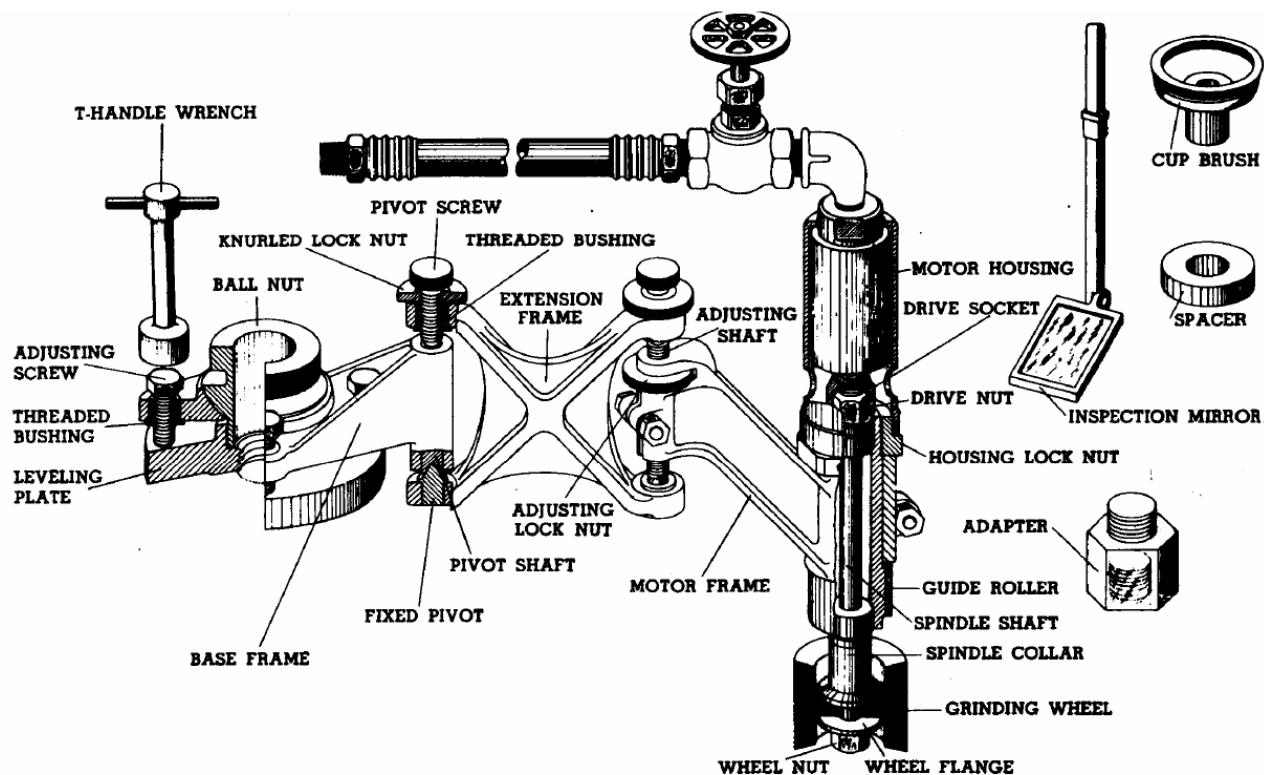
Assembly of air-driven handhole seat grinder, showing names of parts.
